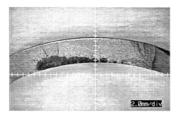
Initial crack shapes of EDM notched pipe specimens
